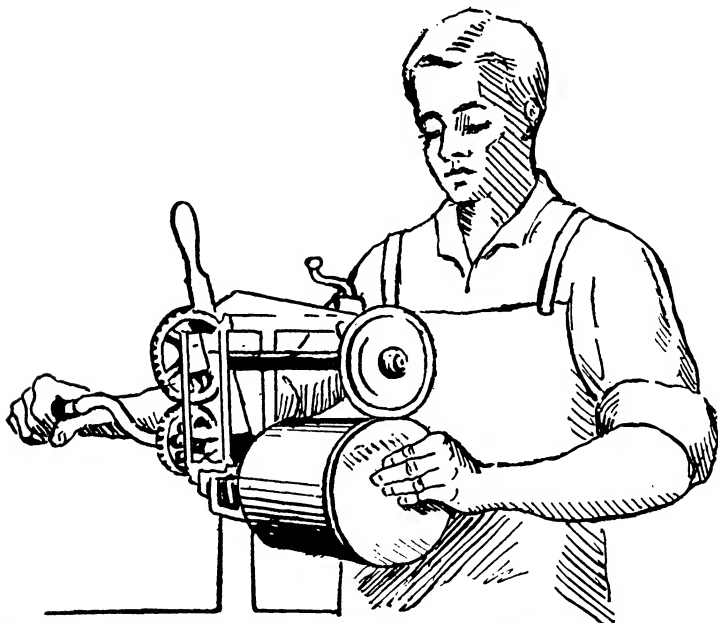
,799.—Double seaming machine and its operation. Fig. 9,796 shows a seam as set down with a setting down machine, and figs. 9,797 and 9,798, the progressive turning over of the seam with the double seaming machine making a tight joint.
